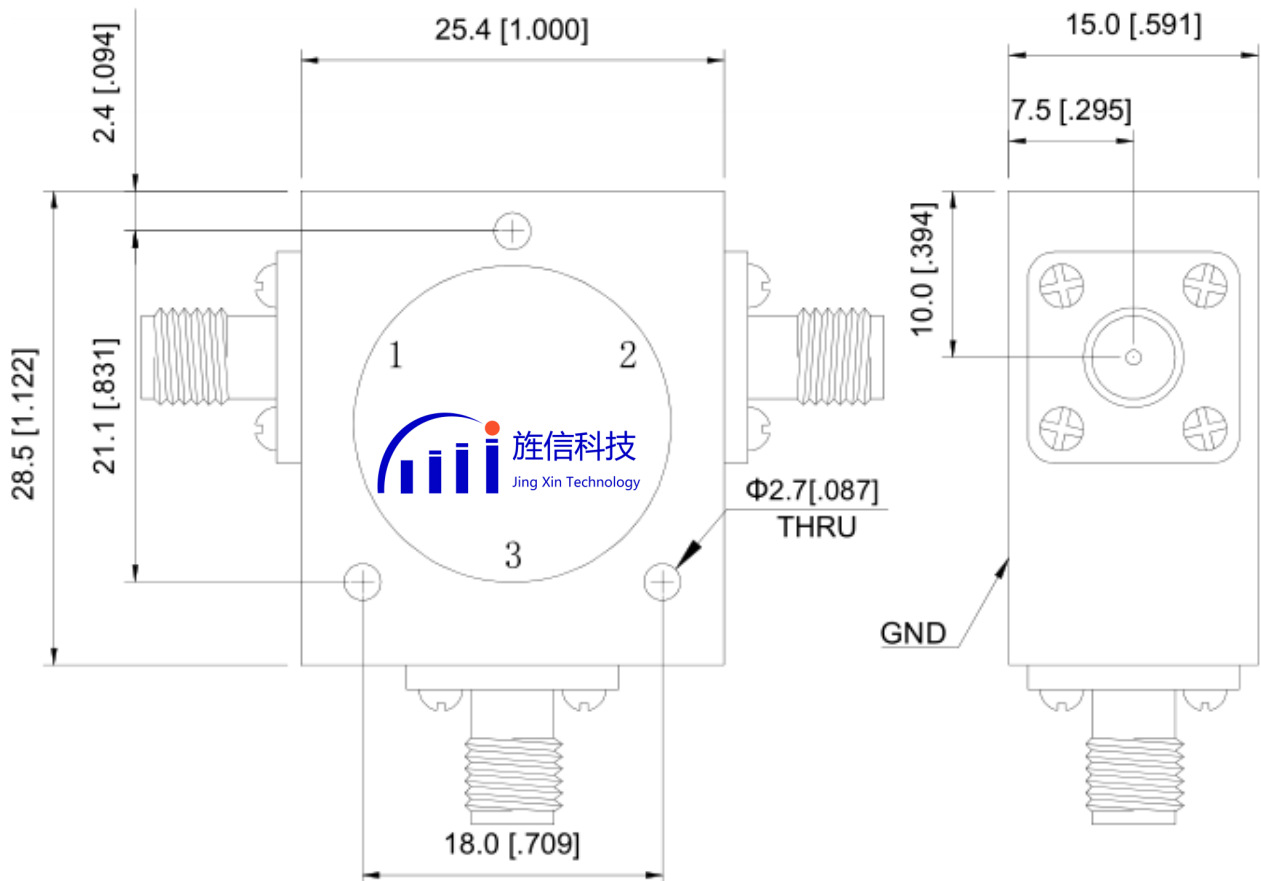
JX-CT-xxxMxxxM-xN_xS front panel layout
